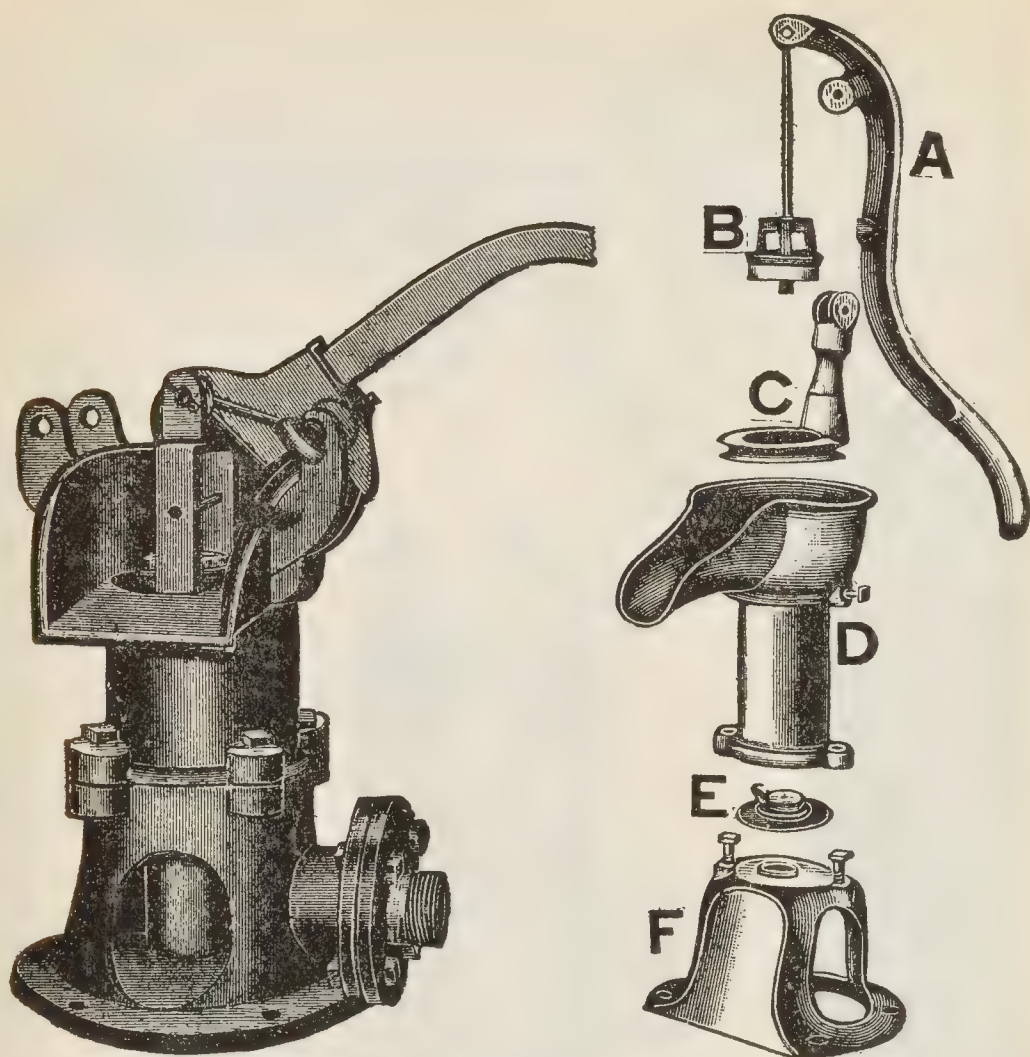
,743.—Butler iron pump cylinder showing bucket, bucket valve and foot valve.
